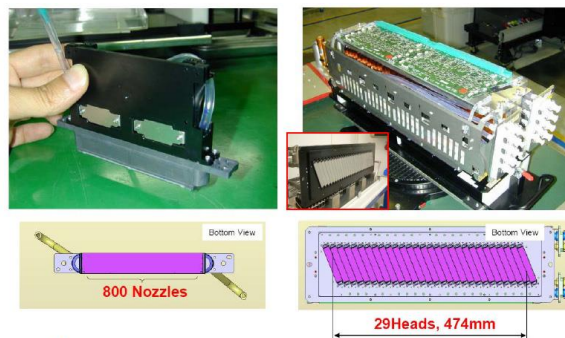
Example of nozzles, printhead and print module (Ref Panasonic)
